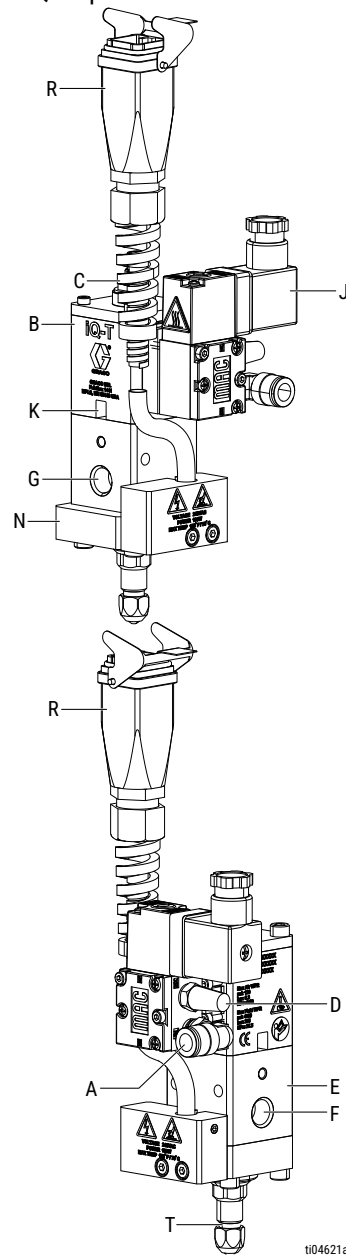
Tip Seal, Heated Valve Mounted Solenoid 2011765 Valves
